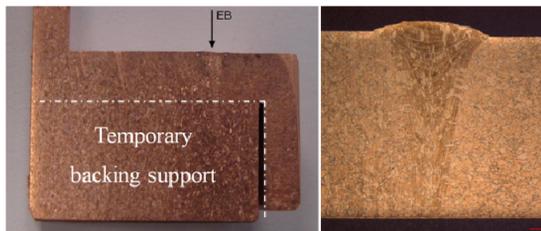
Cross-section of the weld before (left) and after (right) removing the backing support.
